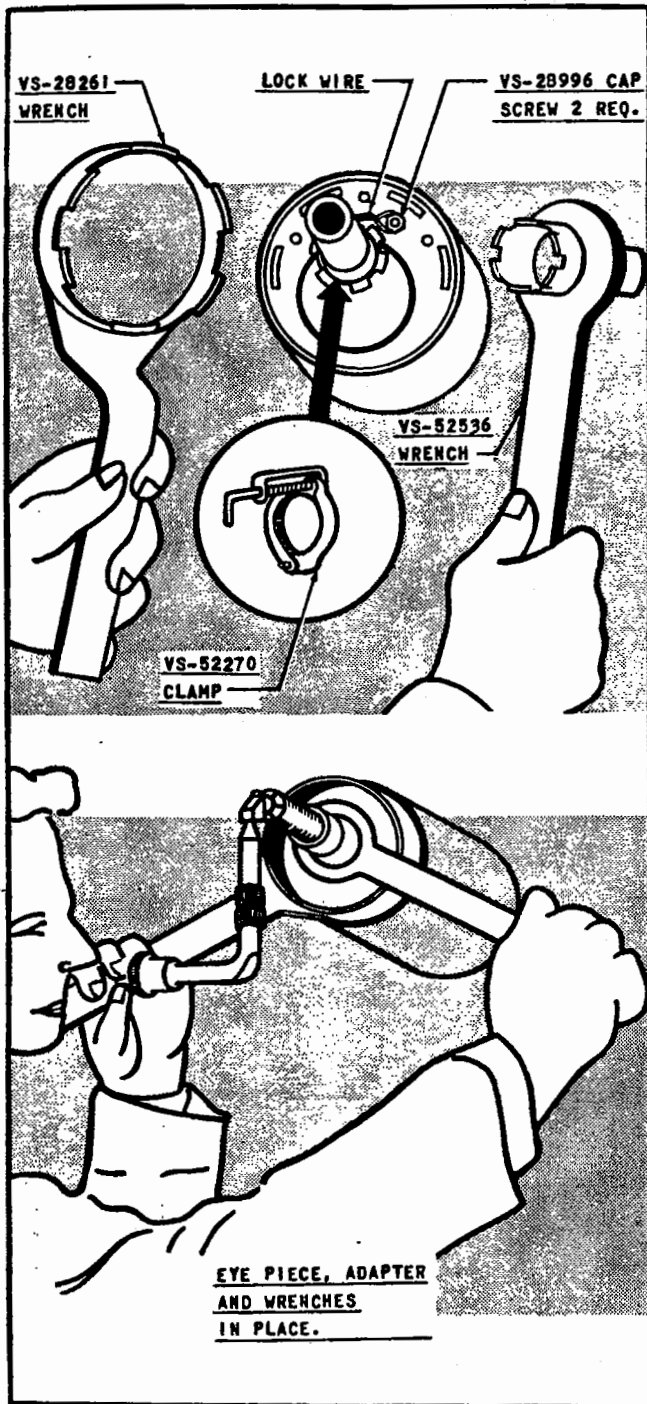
Use of Boresight Wrenches and Boresight Eyepiece.
